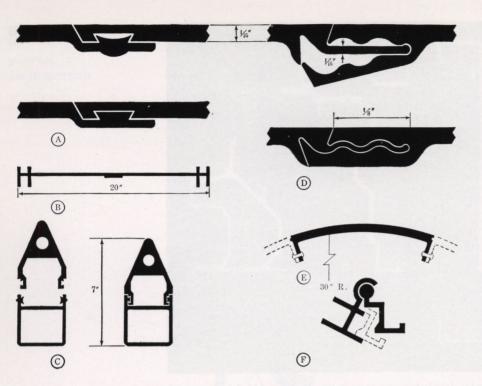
Special types of fits for parallel assemblies of extruded sections include a tongue-and-groove fit secured by a rolling pass (A), and a dovetail fit secured in the same manner (D). Sketches B and C show two examples of shapes which cannot be produced as integral sections because they exceed fabricating limits; they can, however, be designed as split-up sections and assembled after extrusion. Sketch E shows a cylinder of 60-inch diameter, built up from extruded segments. Sketch F shows a ball and socket type joint.
